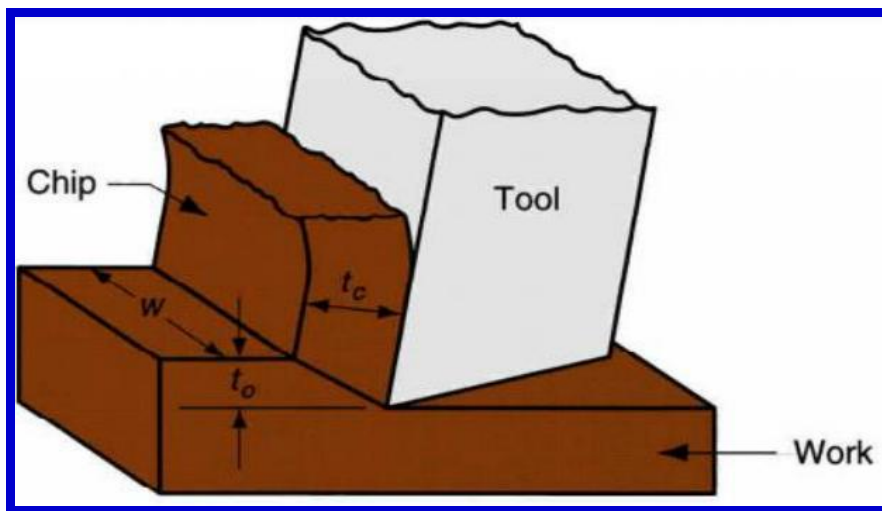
Orthogonal Cutting (2-D Cutting) [19].
